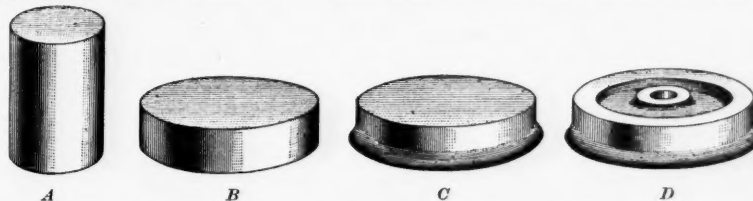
Stages in the Forging of a Solid Steel Wheel.
